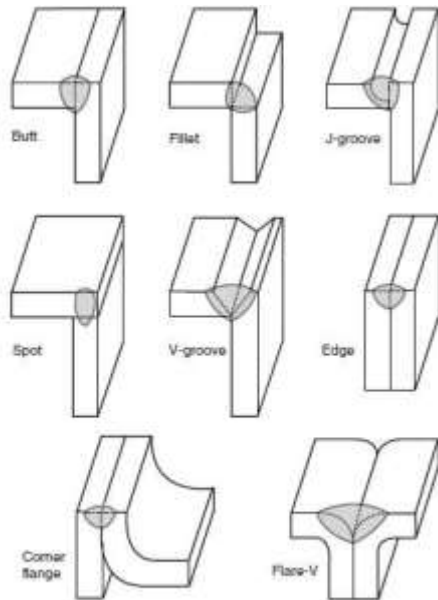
Types of welds that may be made with a basic corner joint.
